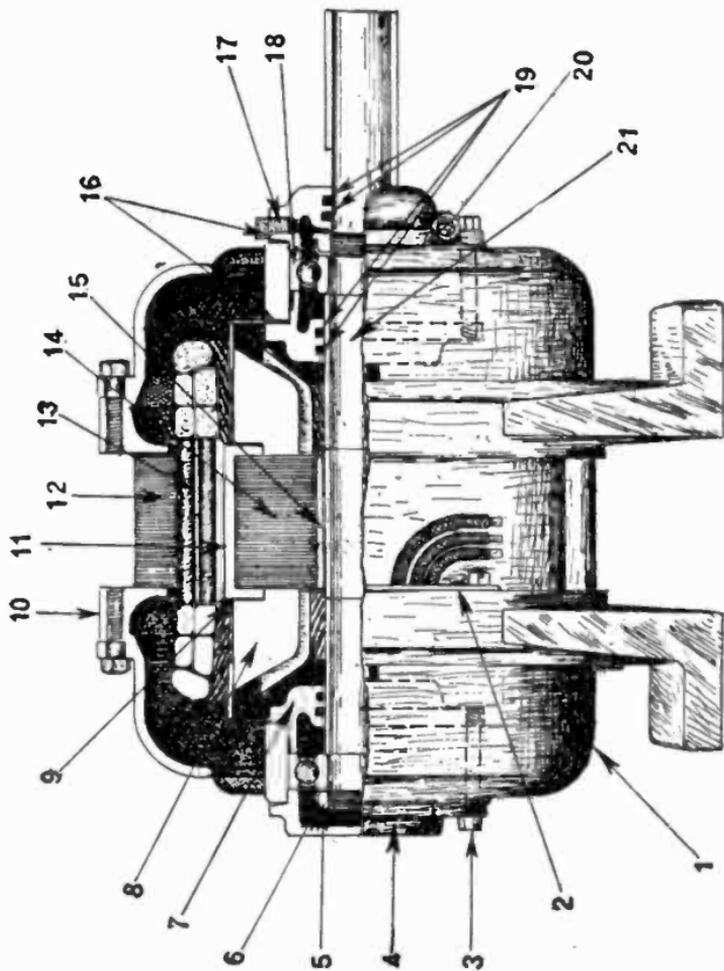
Sectional view of Reliance type AA ball bearing squirrel cage motor, riveted frame. A special feature of the squirrel cage armature construction is the multiplicity of short circuiting rings. The holes in the rings are bored slightly smaller than the diameter of the copper rods, and the forced fit gives good contact. The rings having been forced in place are dip soldered in an alloy of tin of high melting point. *The parts are:* 1, bearing bracket; 2, terminal board; 3, bearing assembly screw; 4, outer bearing cap; 5, lock nut; 6, lock washer; 7, inner bearing cap; 8, fan; 9, arc welded short circuiting ring; 10, field and flange; 11, armature bar; 12, field laminations; 13, field coils; 14, armature laminations; 15, armature key; 16, vellumoid gas-kets; 17, filling plug; 18, ball bearing assembly; 19, felt grease seals; 20, drain plug; 21, shaft; 22, complete field; 23, armature; 24, slide rails.
